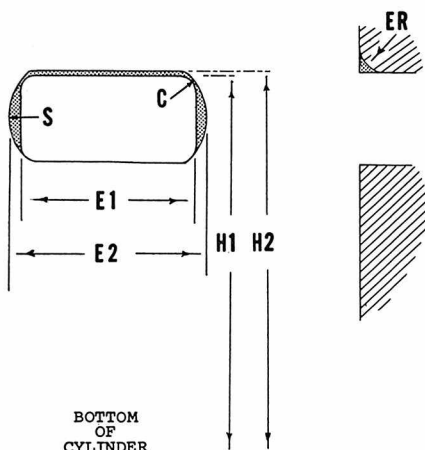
Raising the exhaust port in cylinder will cause port to open sooner. If port modifications are incorrect, rings will probably catch and cause extensive damage. Radius (S) at sides and rounded edge (ER) guide rings back into grooves.
